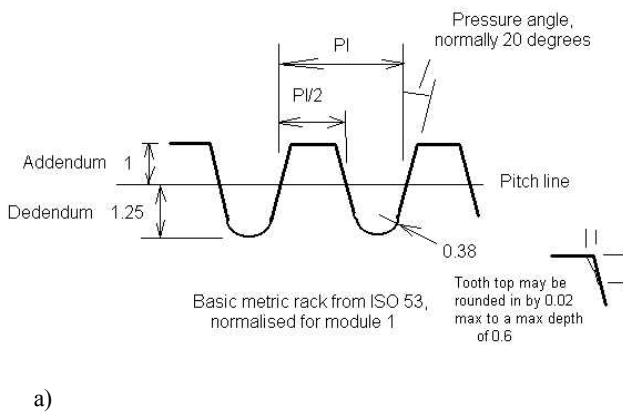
Standard rack dimensions and the basic rack tool form [Doug Wright UWA]
